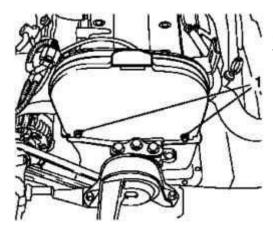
Removing the upper part of lid toothed belt: 1 - bolts fastening
